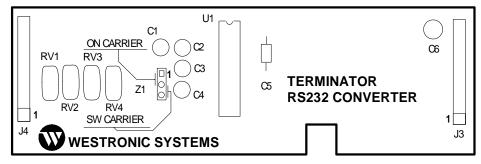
RS-232 Host Interface Board PN 535-T007 Layout
